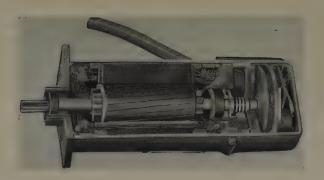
A sectional brake motor showing internal details of the split-phase brake applied to an actuator motor
